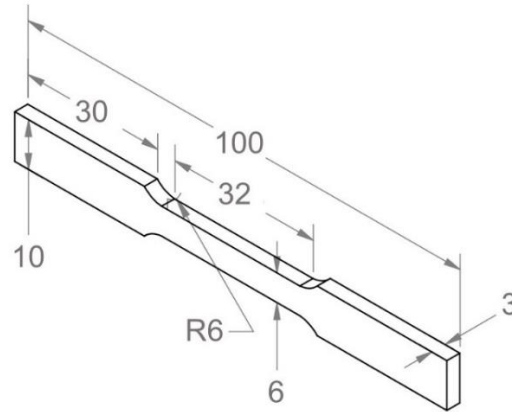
Uniaxial tensile testing specimens geometry (E08/E08M) (dimensions are in mm)
